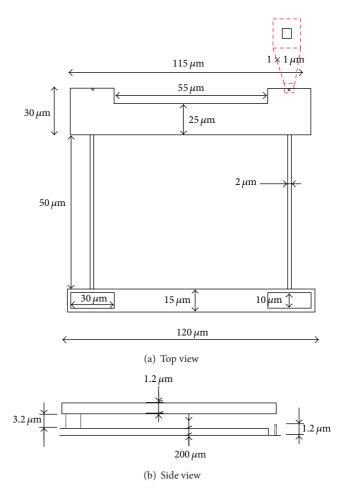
Dimensions of cantilever beam MEMS switch.
